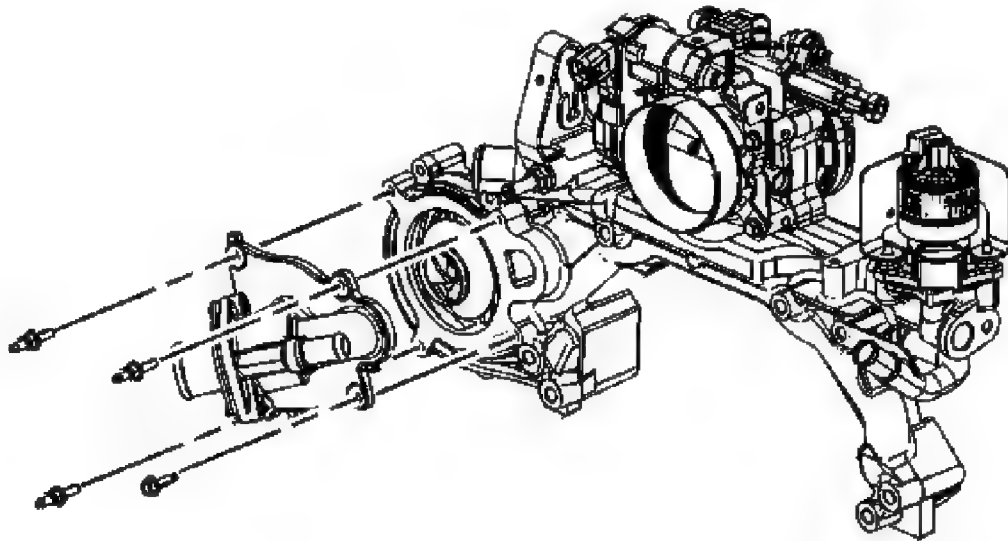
Identifying Water Pump Cover Bolts/Studs
